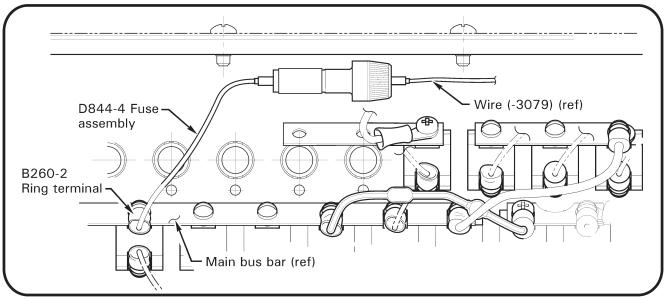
Fuse block assembly installation (location shown for D844-4 is typical)
